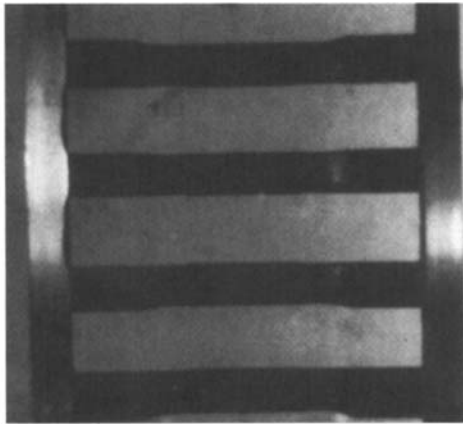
Tribological wear on auxiliary elements of rolling bearings.
